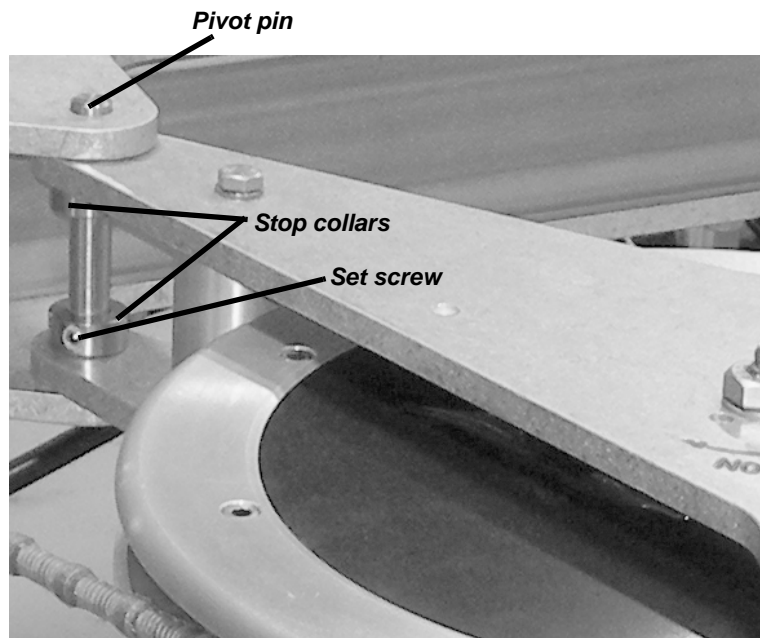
Make sure the pivot pin is through both plates, then position the stop collars and tighten the set screws.
